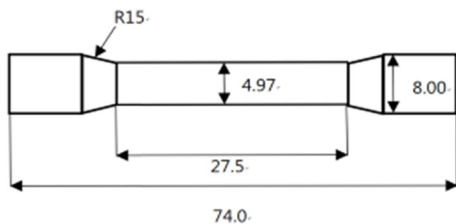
No. 14 specimen of tensile strength test (unit: mm).
